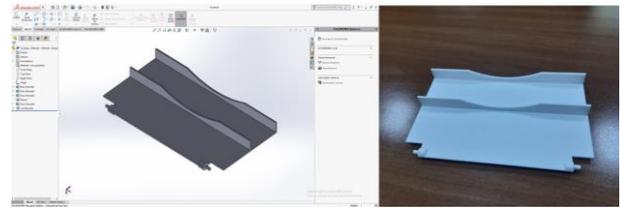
Drawing of the shutter on the pool and a prototype of the shutter made by 3D printing
